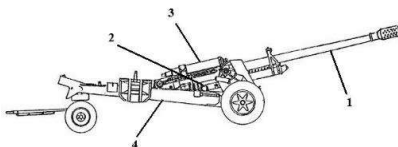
View of the 130 mm M46 gun with assembly positions: 1 – barrel assembly; 2 - upper carriage assembly; 3 - assembly of the anti-roll device; 4 - lower carriage assembly [6]
